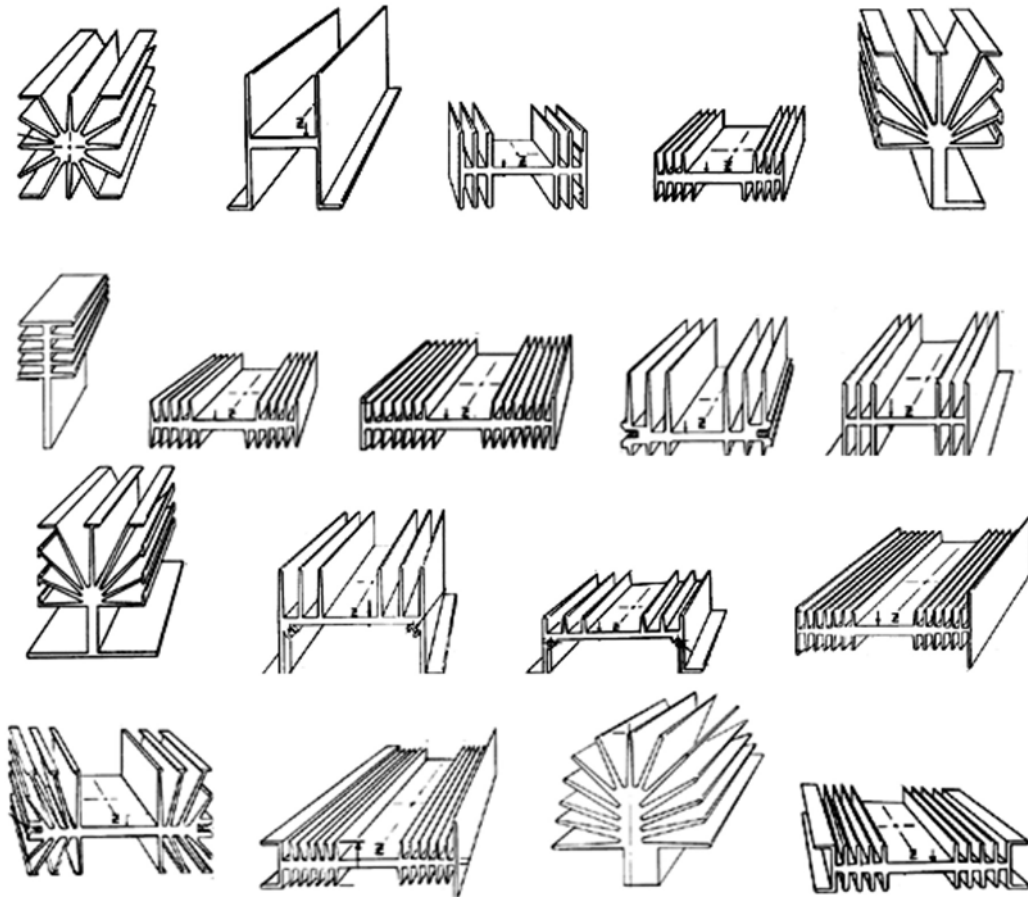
Extruded Aluminum Heat Sinks – Fins 2-Sides
